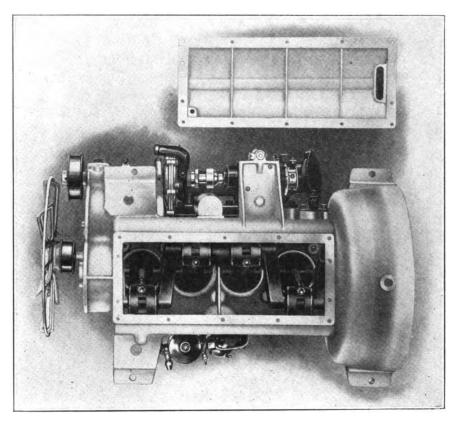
THE CHALMER'S MOTOR FROM BELOW
